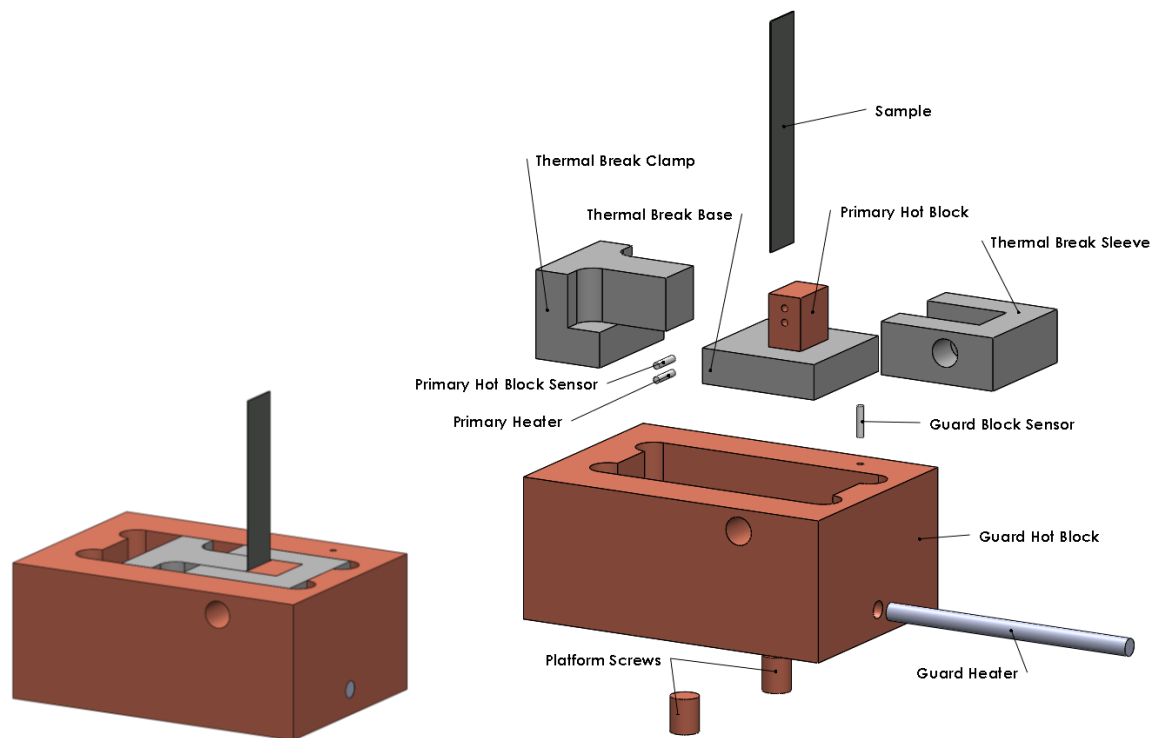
CAD model of heater assembly design and exploded view of all components used for simulation
